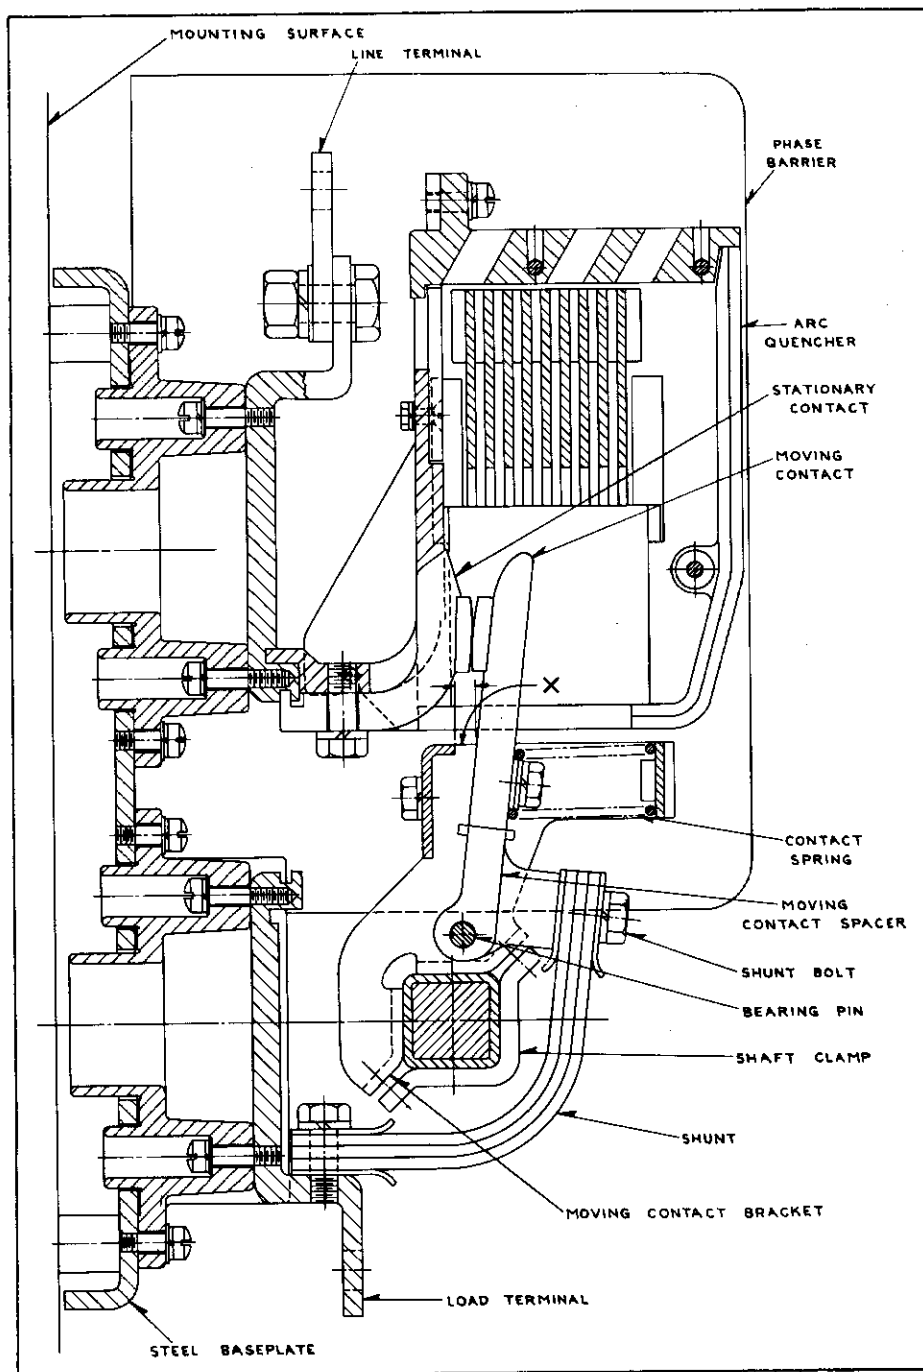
Sectional View through one pole, showing method of overtravel measurement. The pole shown is that of a front-connected GPD 730 Contactor.
